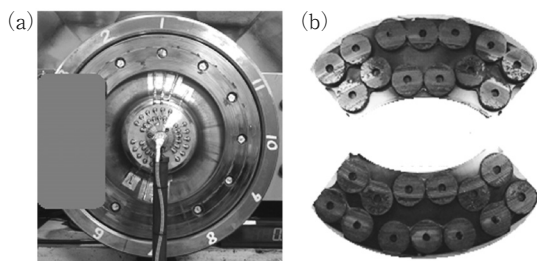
Test material after endurance test (a) Disk (b) Lining [出典：文献 3)]
